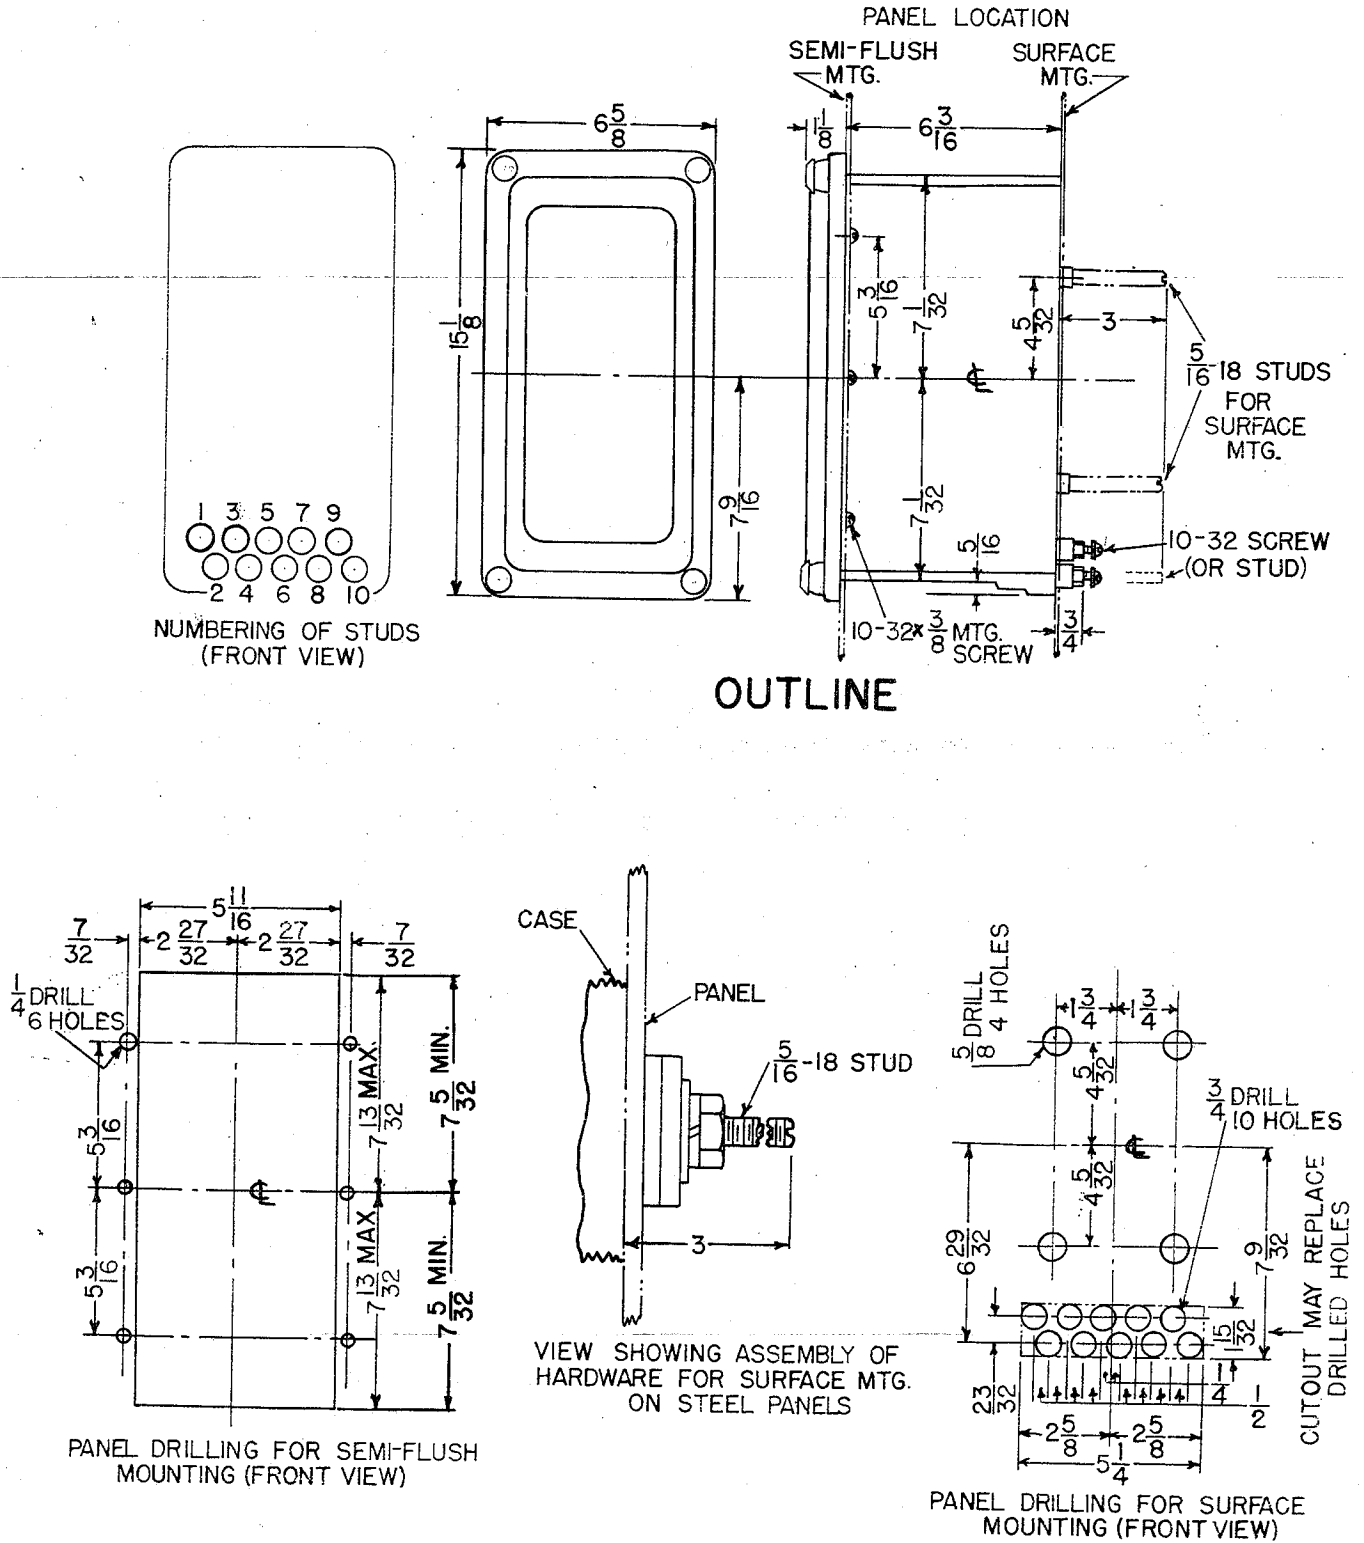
(6209273-2) Outline And Panel Drilling Dimensions For Type IBCG Relays.
